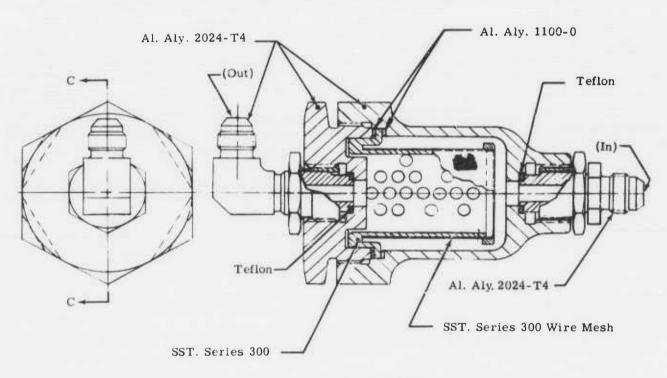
Cross Section - Valve Assembly - Bleed Valve 59-472-275
